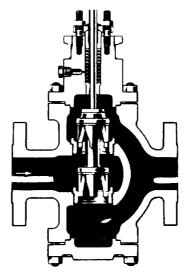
Double port Design "A" body with port guided V-Port valve plug.
